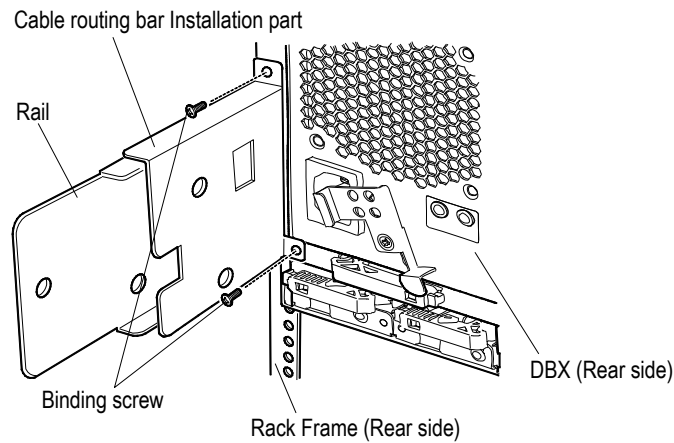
Installing the Cable Routing Bar Installation Part
